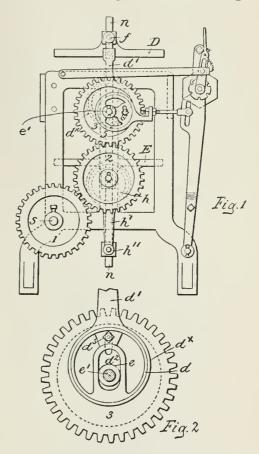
Fig. I is a side elevation of a Jacquard machine, showing the mechanism for operating the griffs and batten. Fig. 2 is a detail view of one eccentric on back of top gear wheel.
